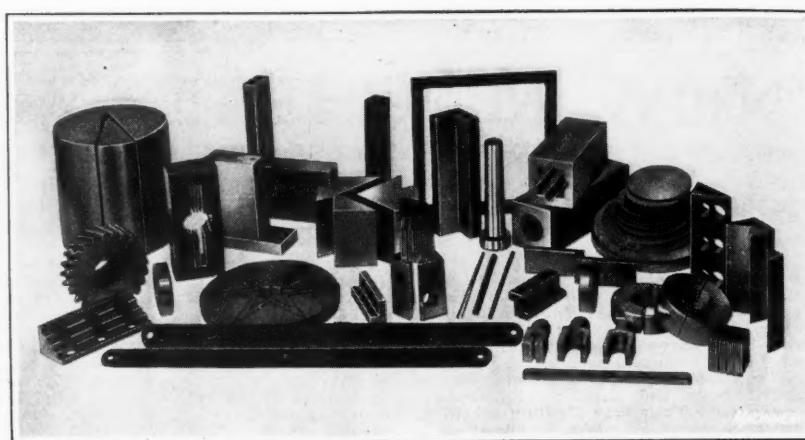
Typical Examples of Work cut on the Peerless Universal Shaping Saw
